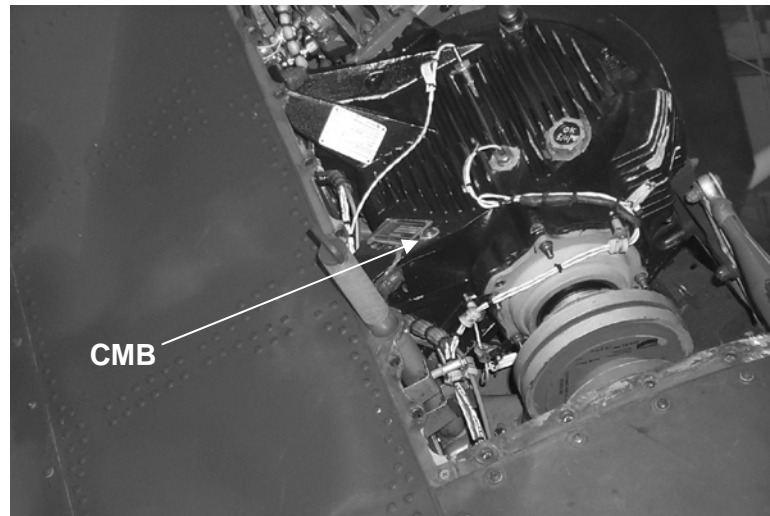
Tail Rotor Gearbox (AH-64A/D) with CMB Installed
